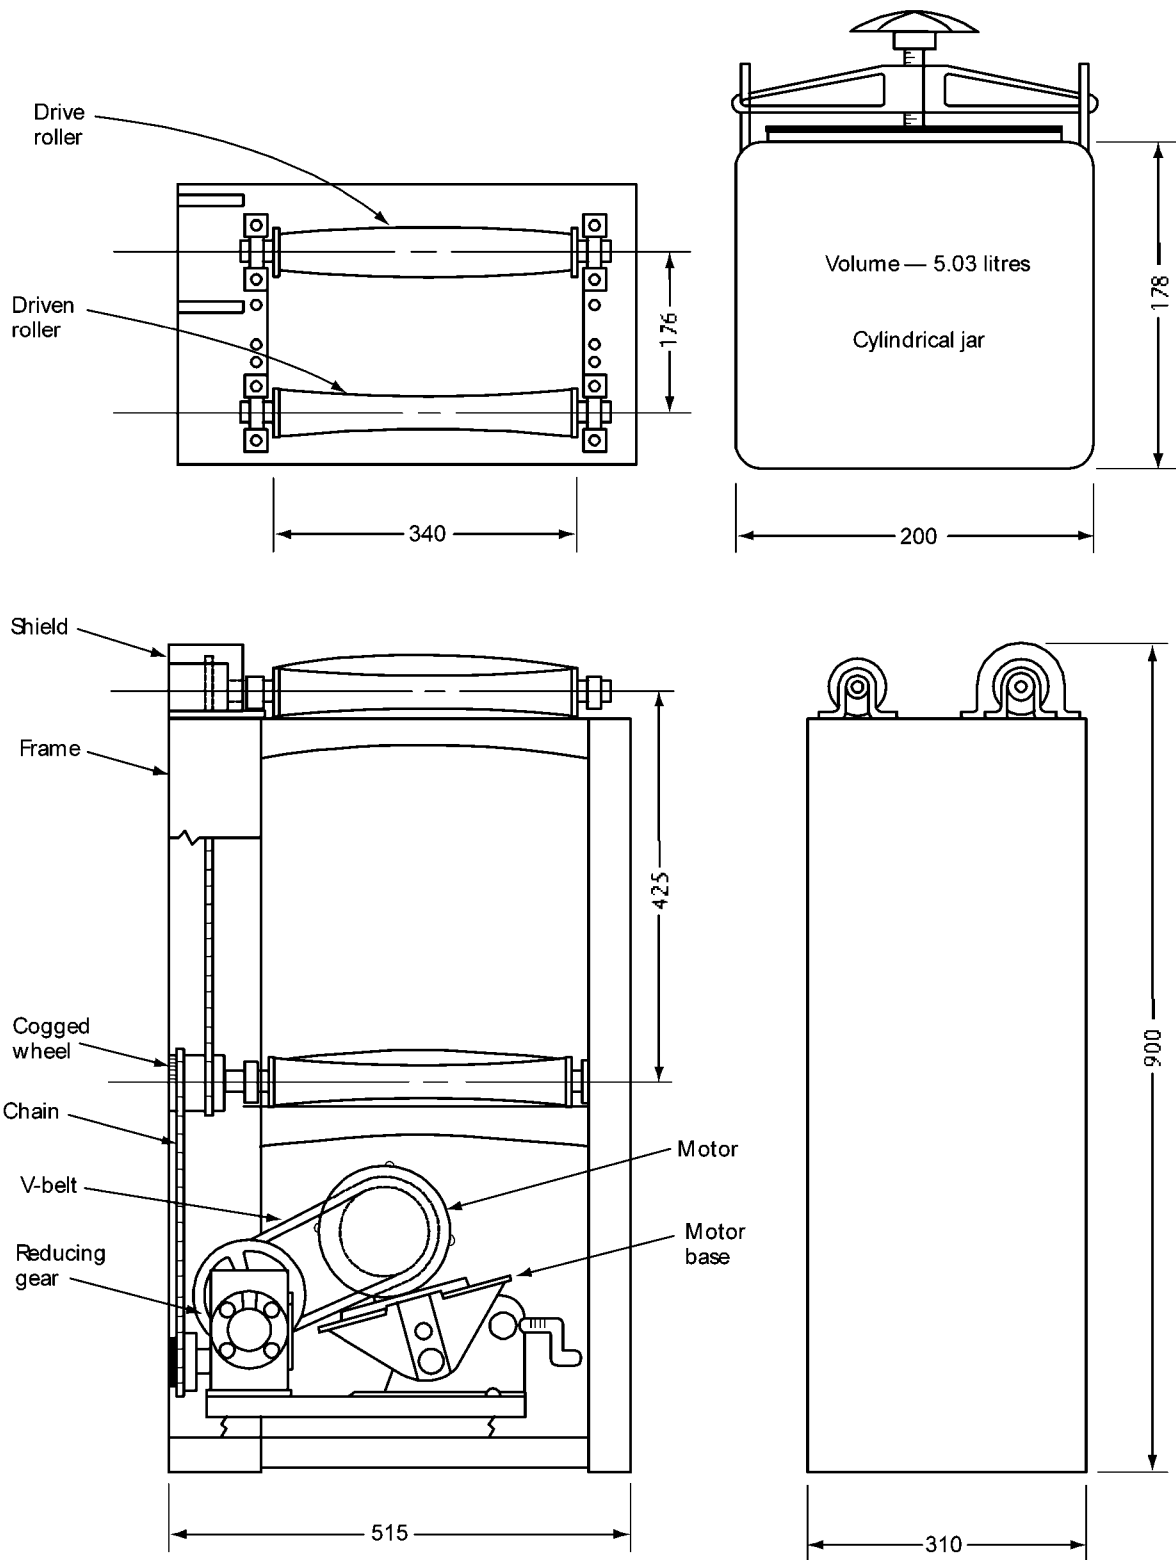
Micro-Deval Abrasion Machine and Container (dimensions in mm)
